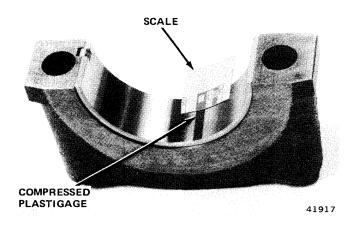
A-55 Checking Main Bearing Clearance with Plastigage
